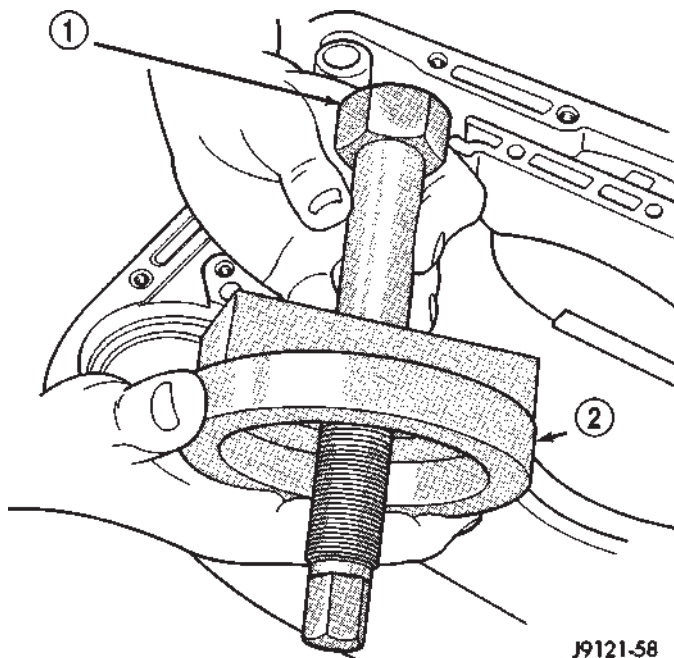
Assembling Clutch Cam Puller Bolt And Press Plate
